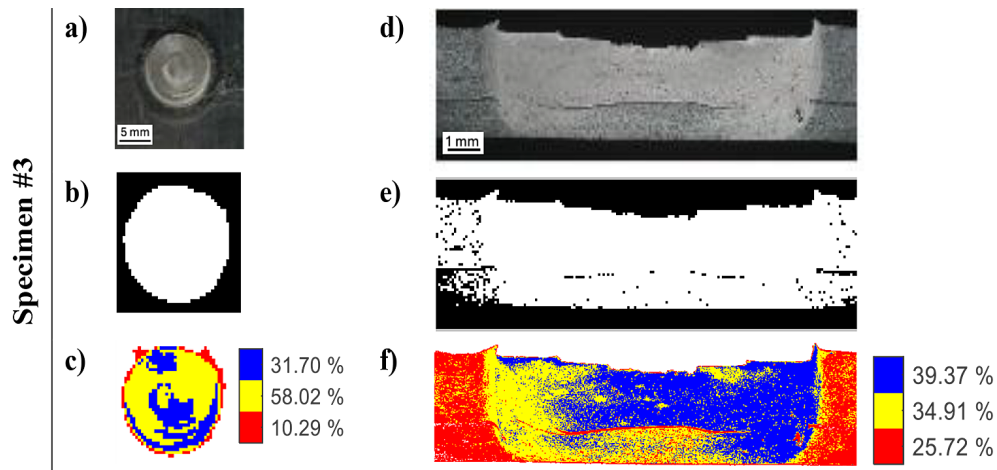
Inspection of the weld of specimen #3: (a) top view - photo, (b) top view-binary segmentation, (c) top view-three-color segmentation, (d) cross-section-photo, (e) cross-section-binary segmentation, (f) cross-section transverse-three-color segmentation.
